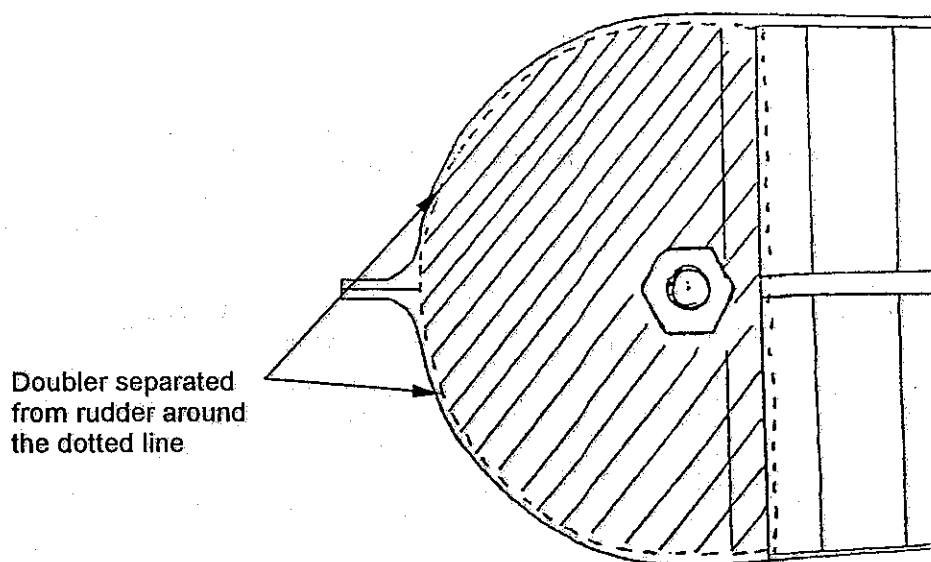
PLAN VIEW OF RUDDER HINGE
